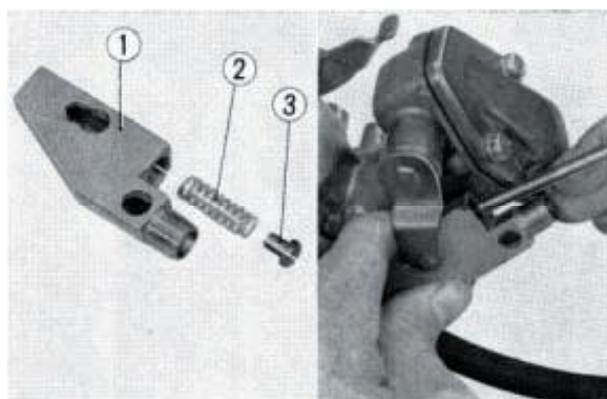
① Adjuster holder ② Coil spring B ③ Spring seat B
